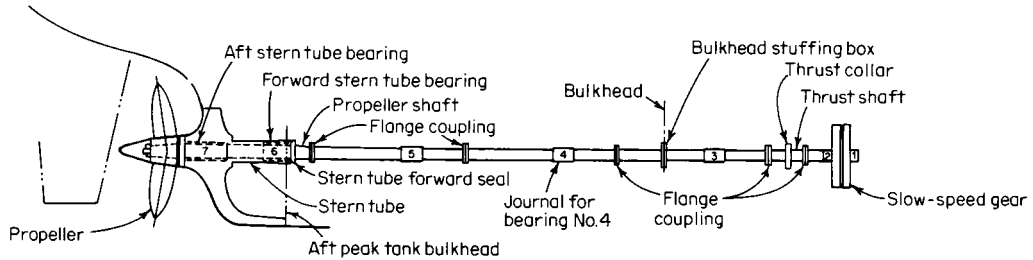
Shafting arrangement without strut bearings. (From "Marine Engineering," SNAME, 1992.)
